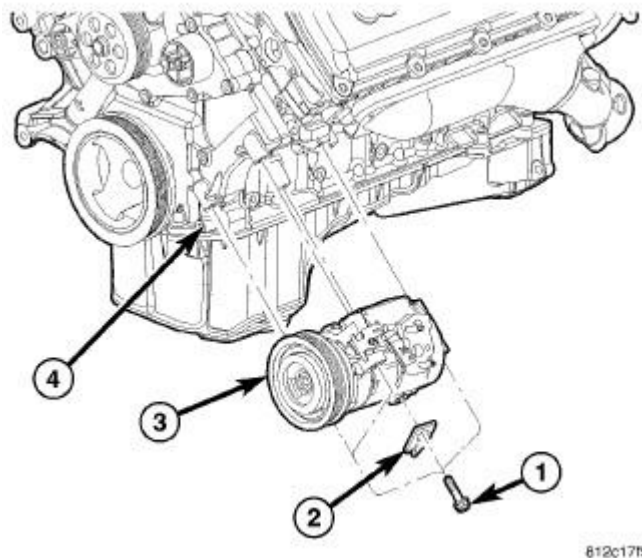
COMPRESSOR-A/C 5.7L REMOVAL/INSTALLATION
